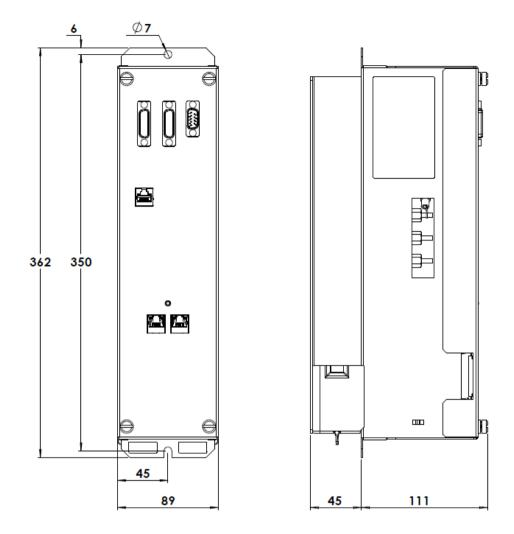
3A, 6A, 12A & 20A Drive dimensions (without IO Interface) Recessed mount
